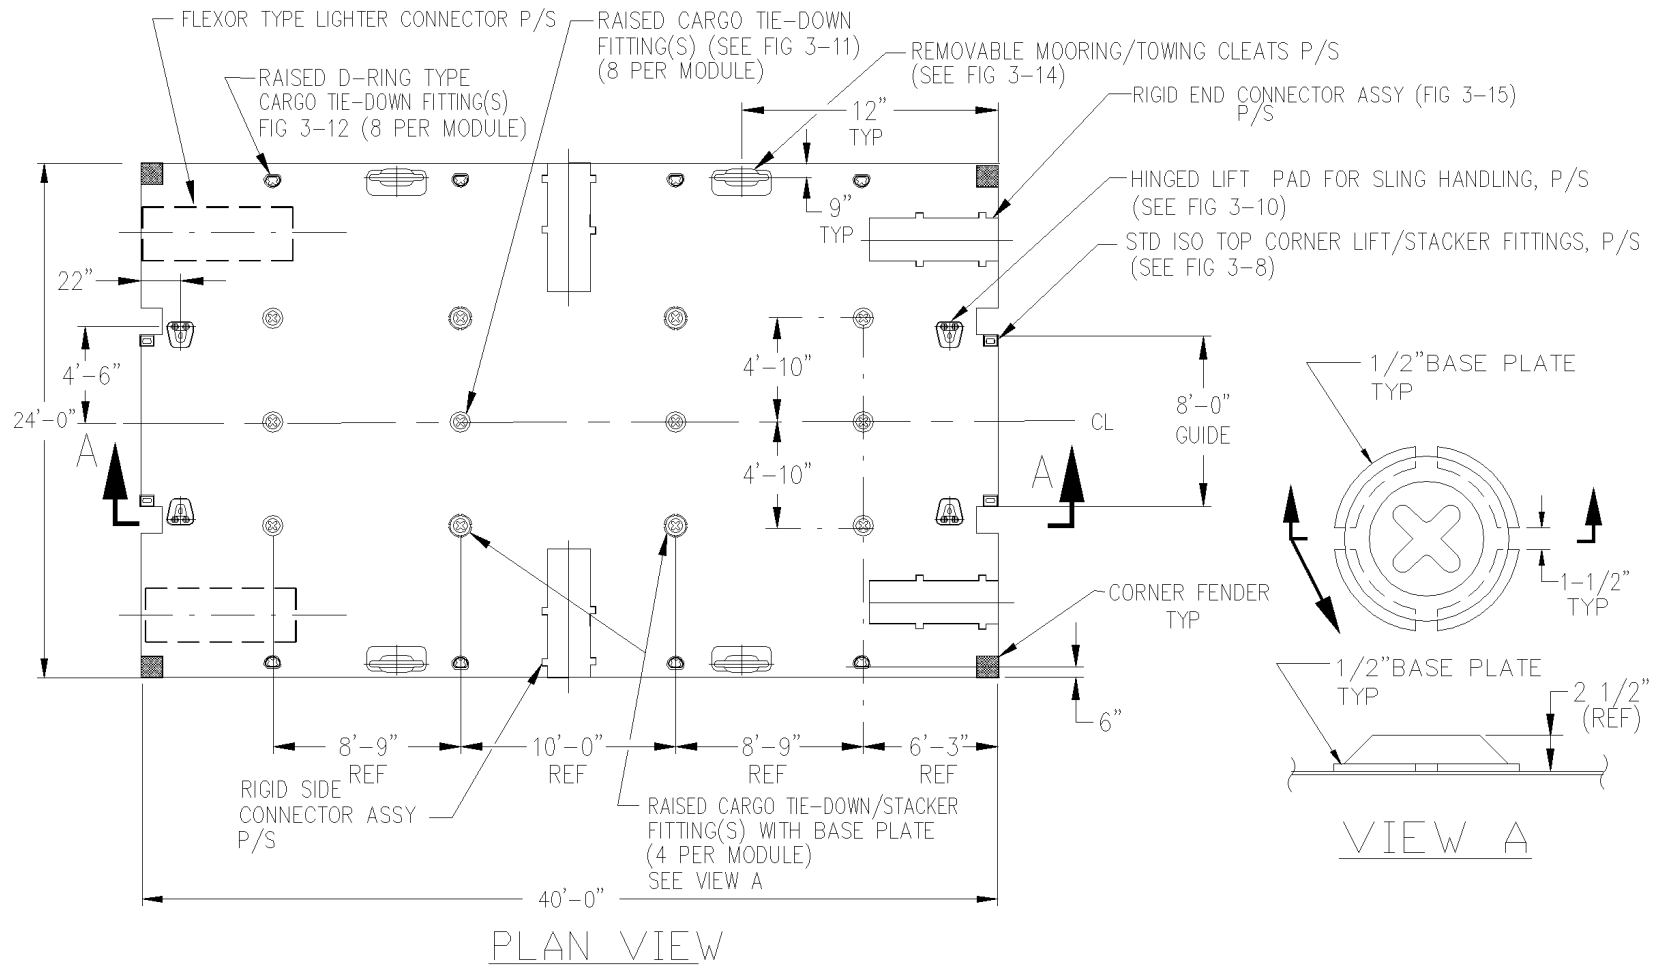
ACB Lighter Raked Module Deck Fitting Arrangement and Details (Sheet 1 of 2)
